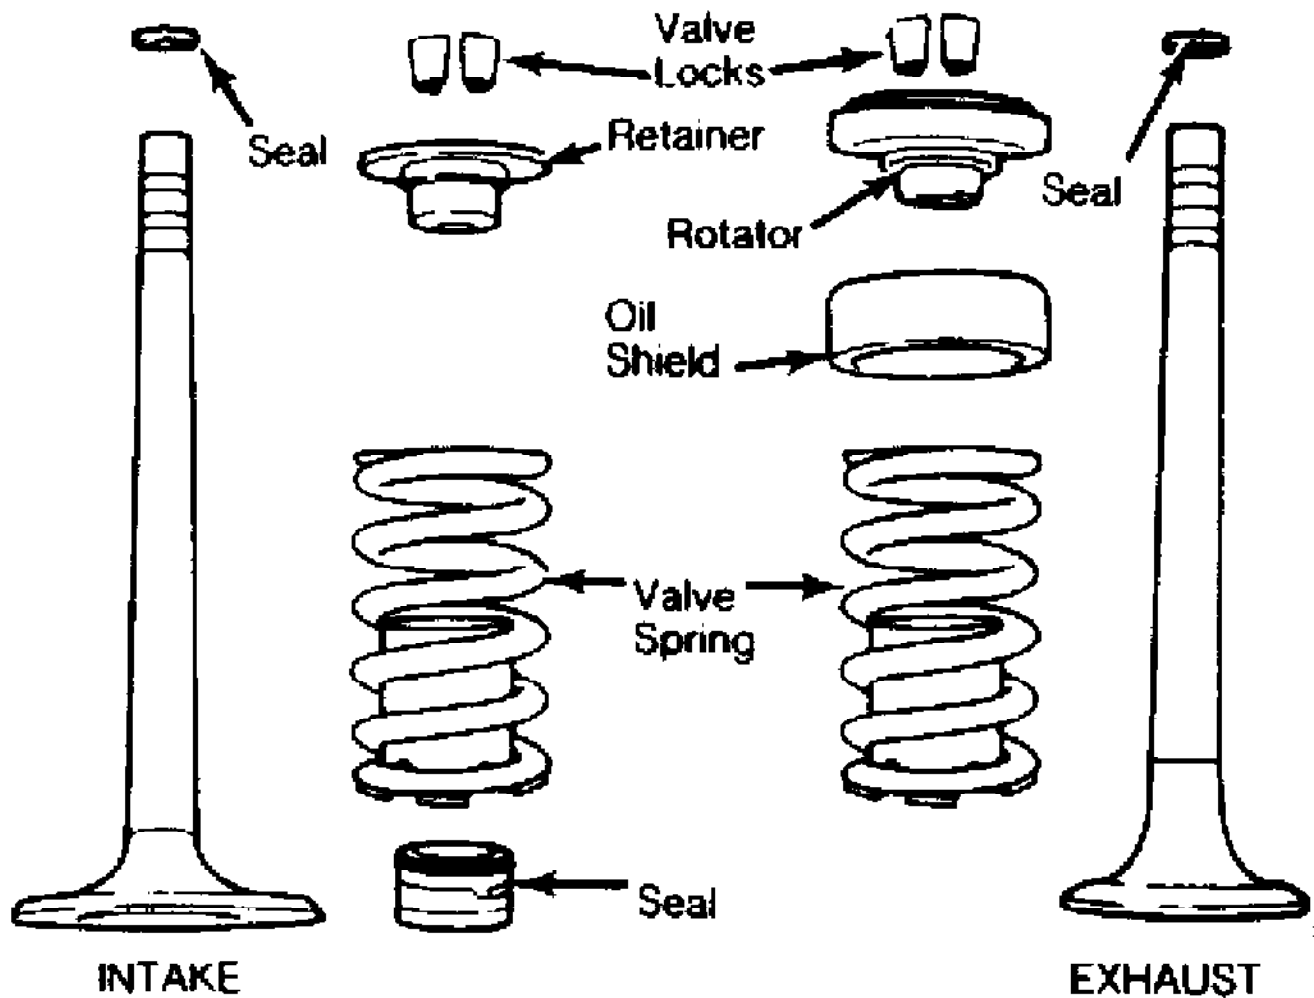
Exploded View of Intake & Exhaust Valve Assemblies - Typical
